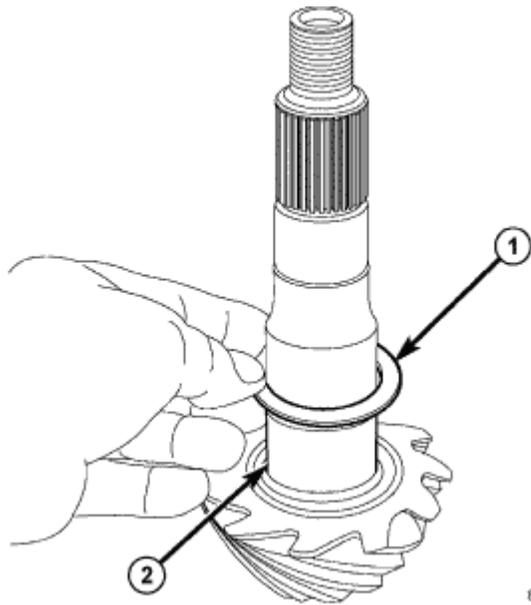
Removing/Installing Pinion Depth Shim From/On Pinion Shaft
